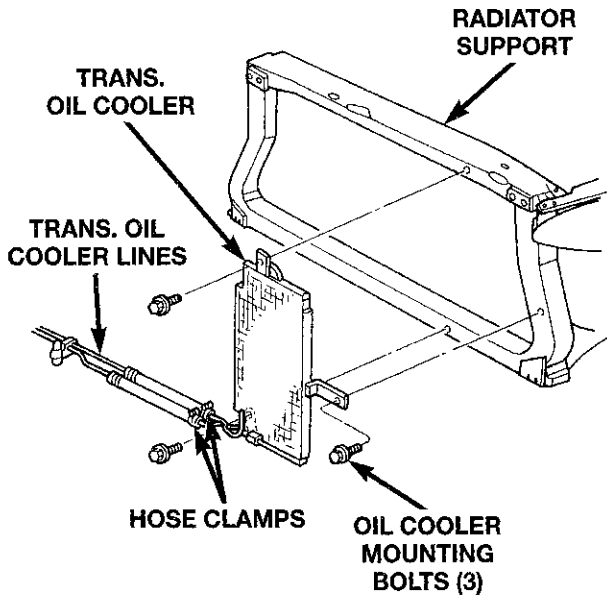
Auxiliary Transmission Oil Cooler—8.0L Engine
